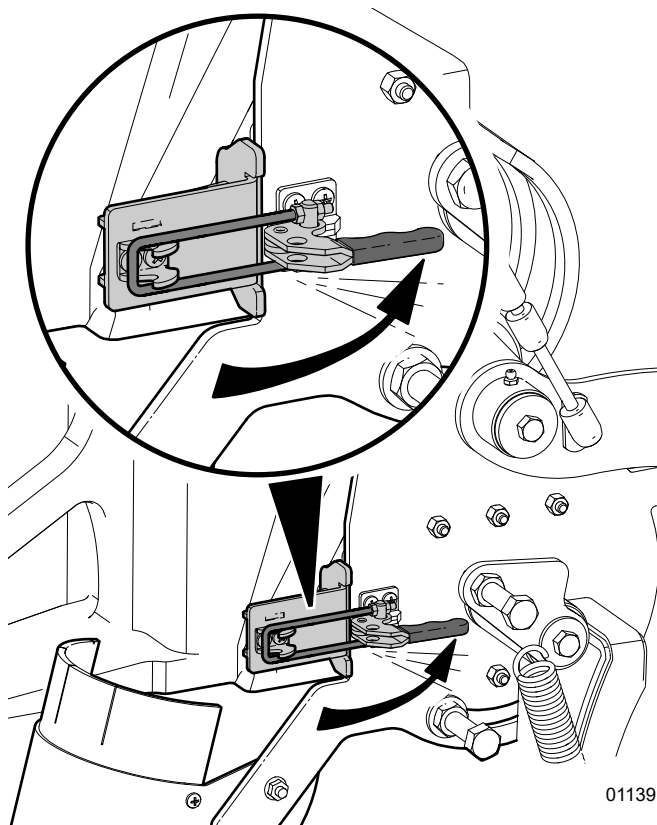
Draw Latch on Chain Saw Pivot Frame
